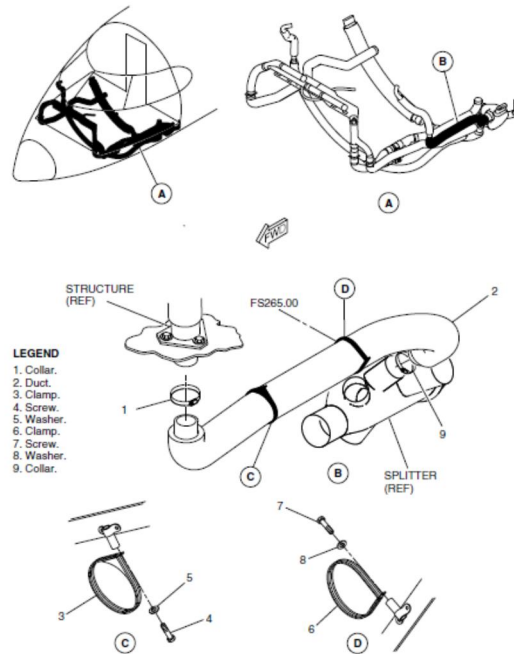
Below-Floor Left Overhead Ventilation-Duct FS237.12 to FS272.50-Removal/Installation
